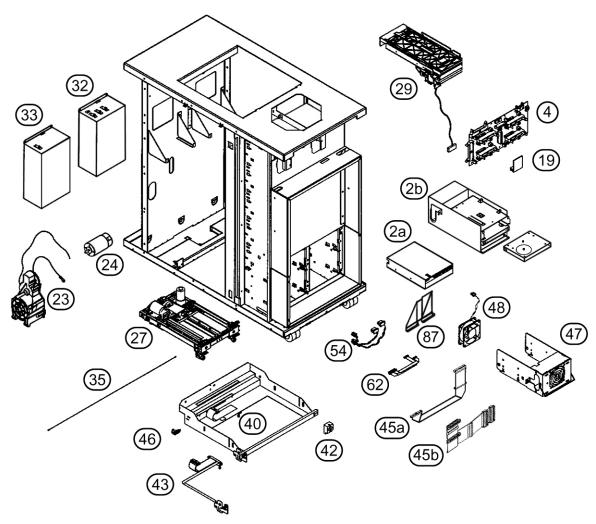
Exploded view for 1000ux/1900ux/2300ux models (1 of 3)
